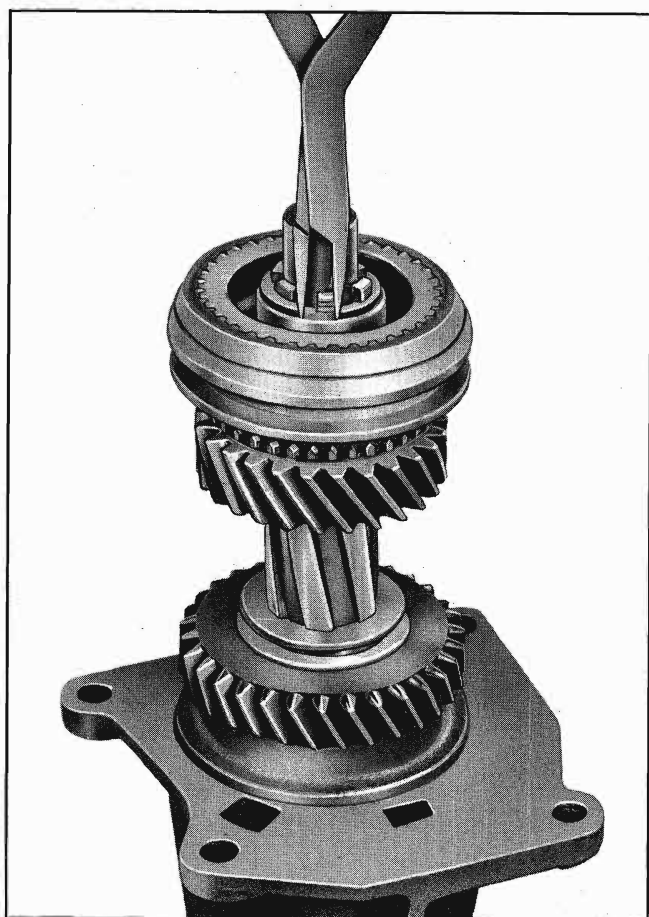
A-17 Removing or Replacing Mainshaft Snap Ring
